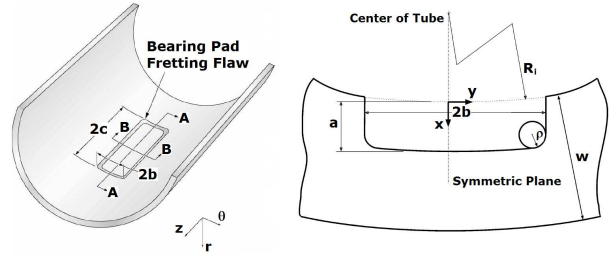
Idealized bearing pad fretting flaw in a pressure tube
